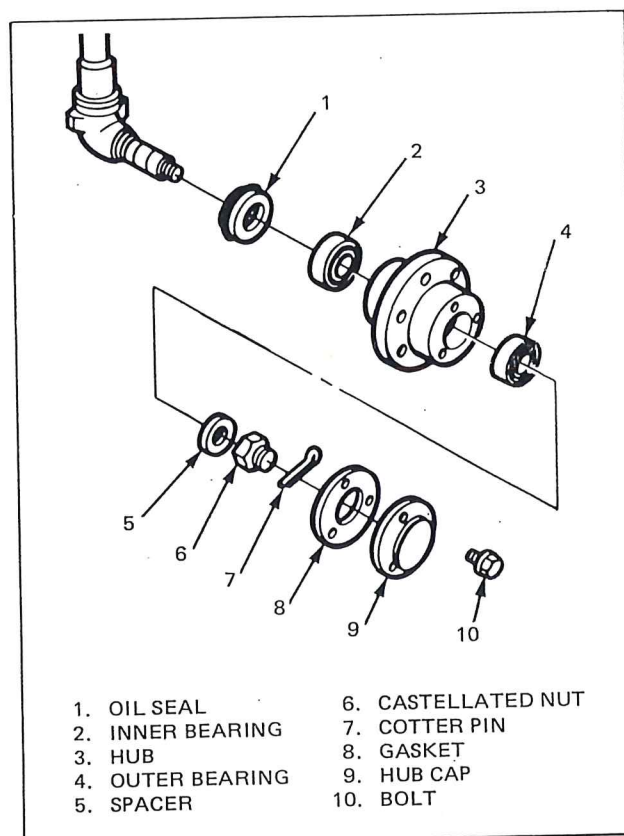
Servicing Front Wheel Bearing—Two-Wheel Drive (SP5000 and SP6000)
